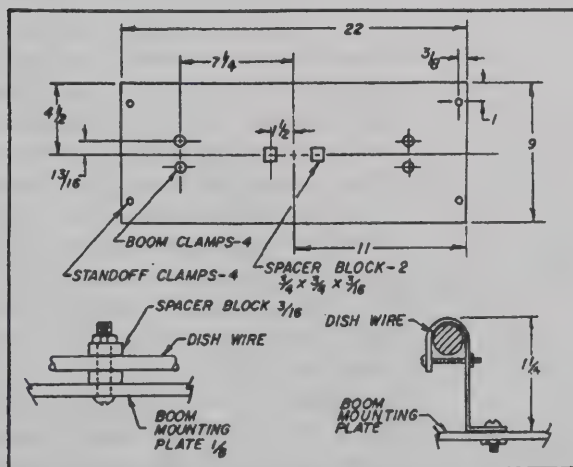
Dish mounting plate clamps and spacers. Dimensions are given in inches.
